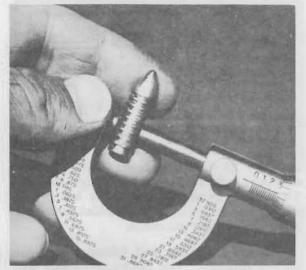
Bullets should be miked after coming out of the mold. Reducing diameter by more than .003" in the die will probably distort the bullet and ruin accuracy.
